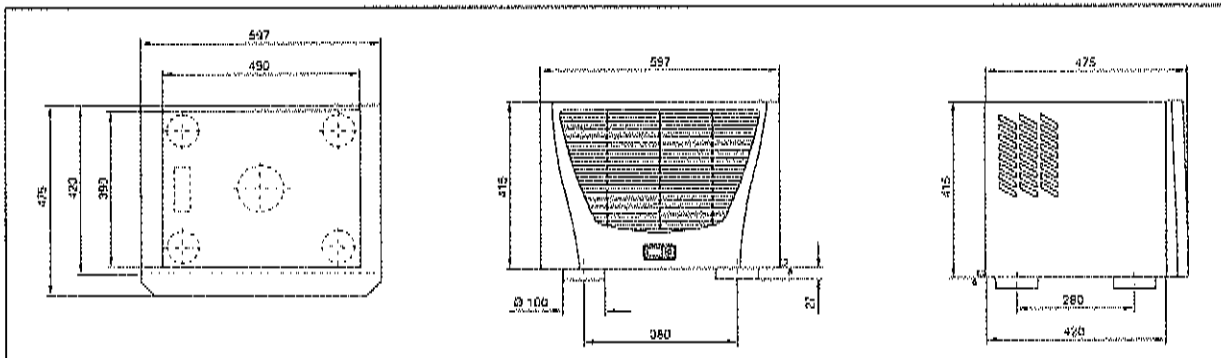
3273.xxx, 3383.xxx, 3384.xxx, 3386.xxx assembly
